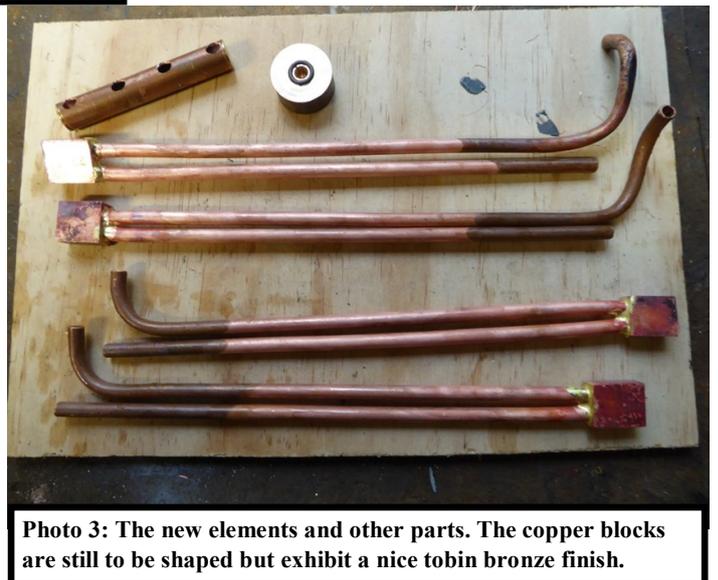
The new elements and other parts. The copper blocks are still to be shaped but exhibit a nice tobin bronze finish.
